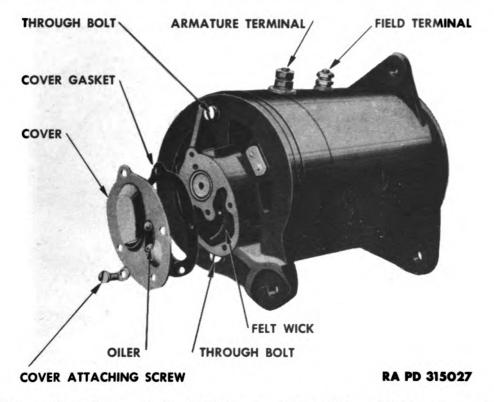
Commutator End Construction of Group 2 Generators with Bronze Bearing at Commutator End
